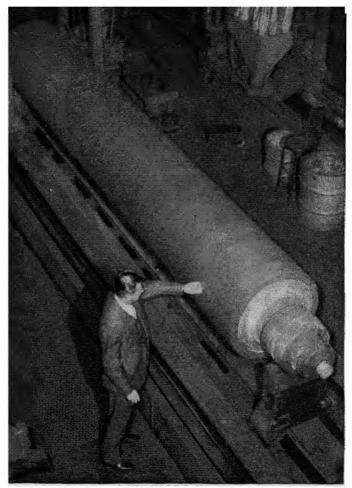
A large paper-mill roll mounted in the factory for grinding to produce a finished surface.
